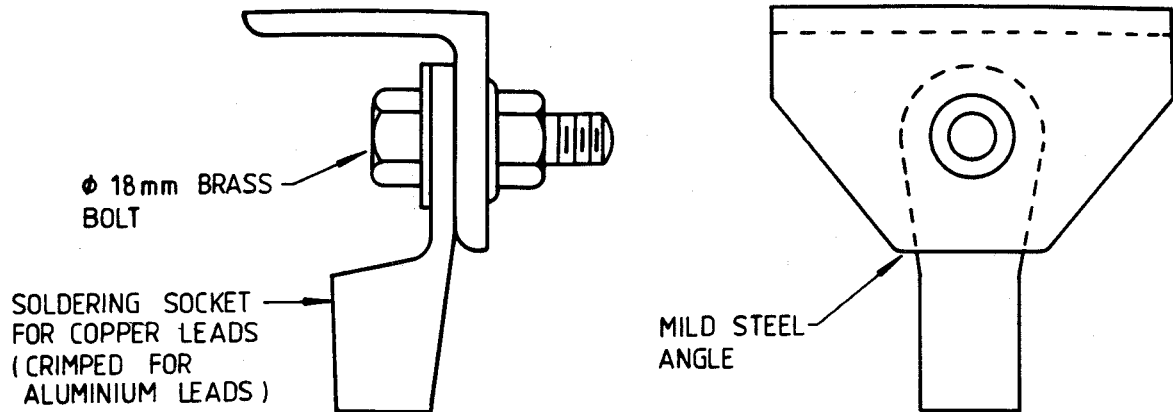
LUGS FOR ATTACHMENT OF RETURN CABLES
